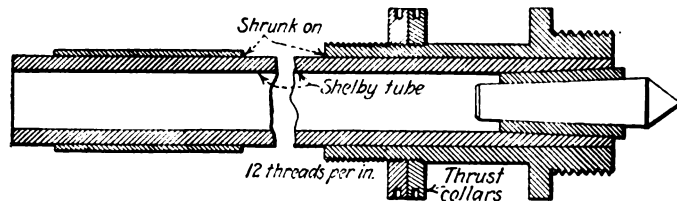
HOLLOW SPINDLE DESIGNED TO REPLACE SOLID ONE
